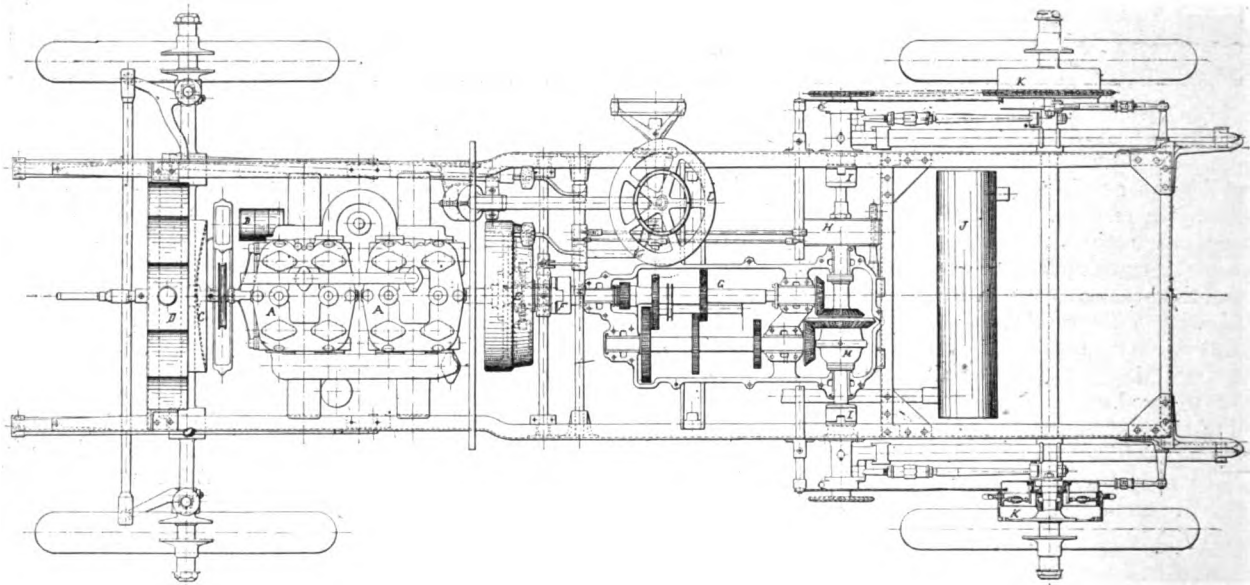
Plan View of Chassis of "Crossley" Car.
